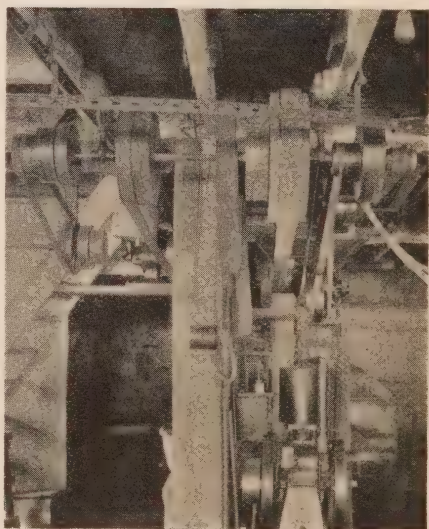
Another view of Motor and Line Shaft shown in Fig 2. The motor has superseded the gasoline engine.
